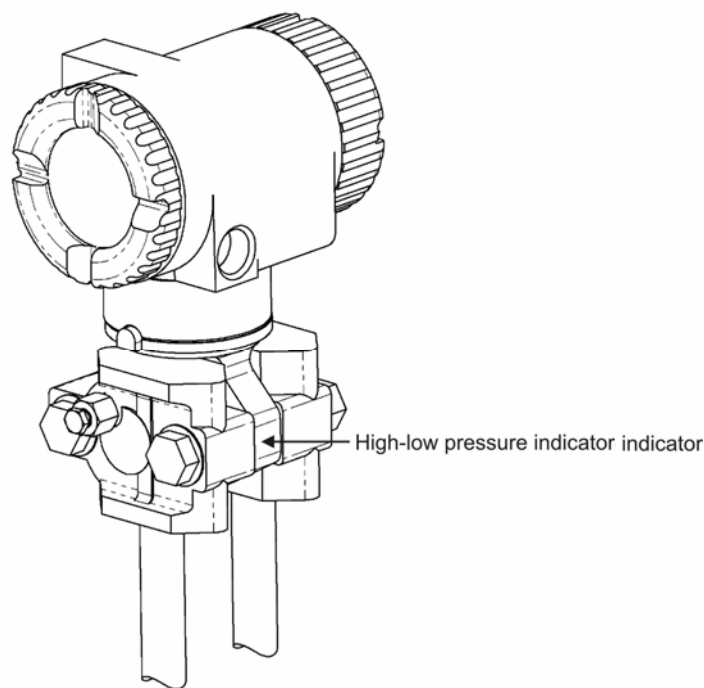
Direct-mount installation; low-profile sensor with bottom process connections
